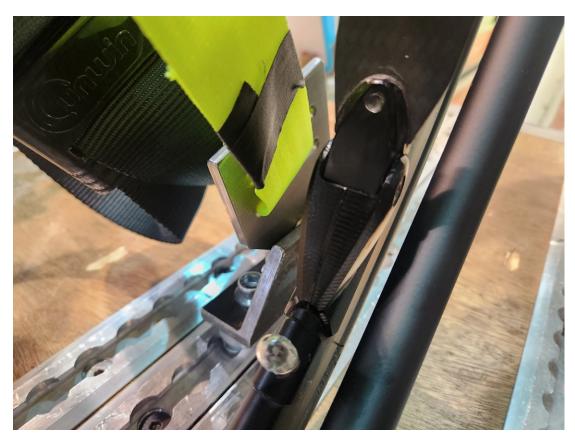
LH rear inner wheel spoke attachment LH side view, post-test
